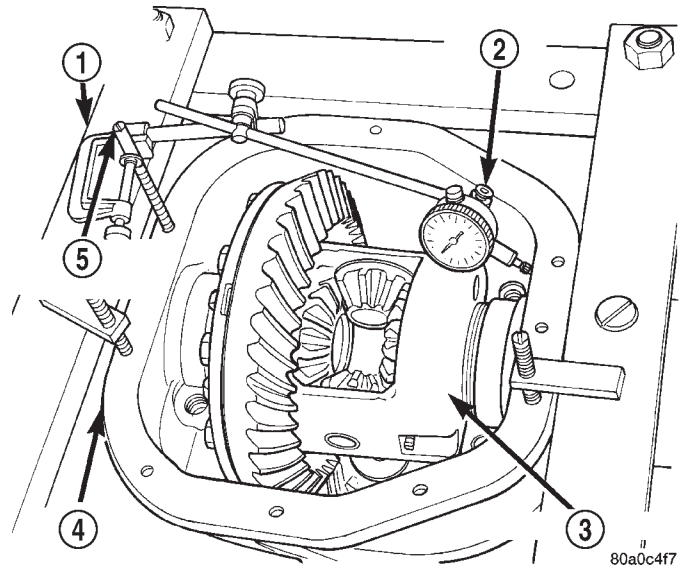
SPREAD DIFFERENTIAL HOUSING
